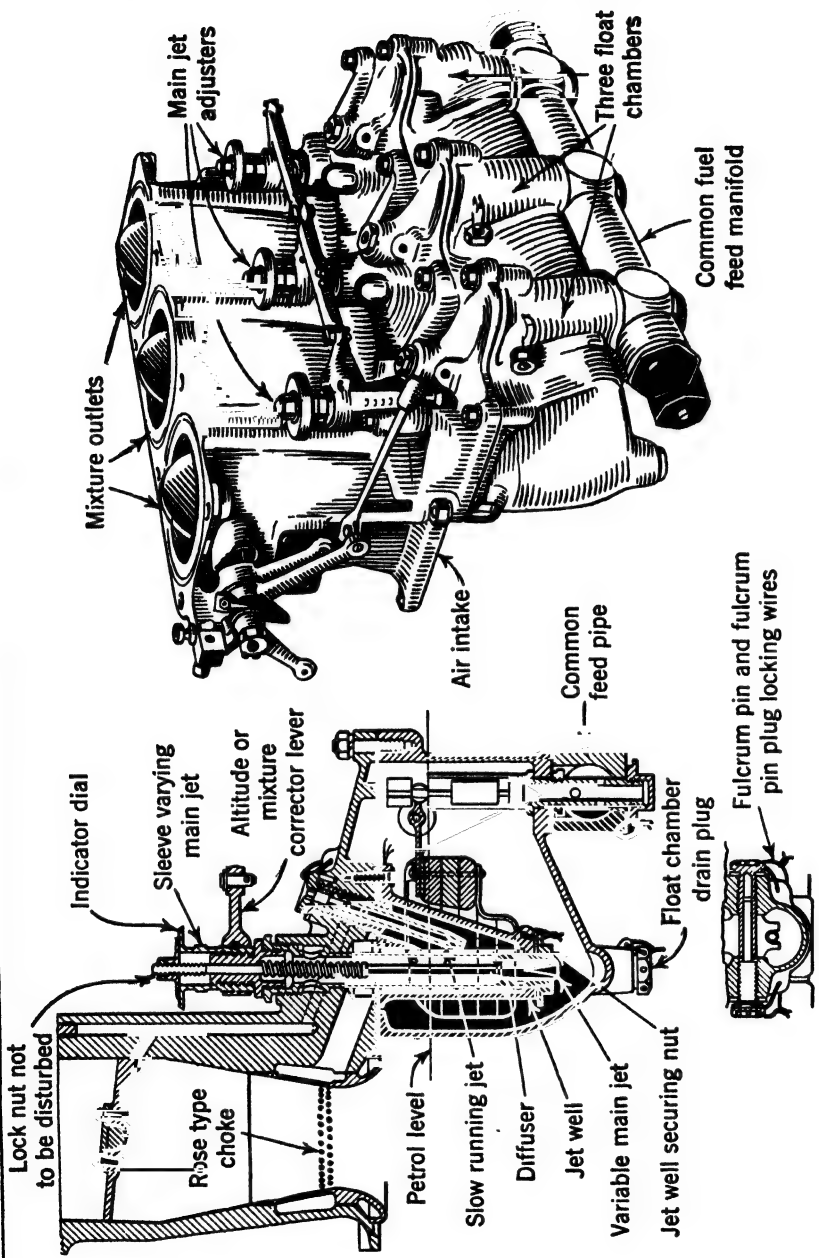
A.—The Bristol Triplex Carburetor Used on Bristol-Jupiter Engines Has an Adjustment for the Main Jet.
